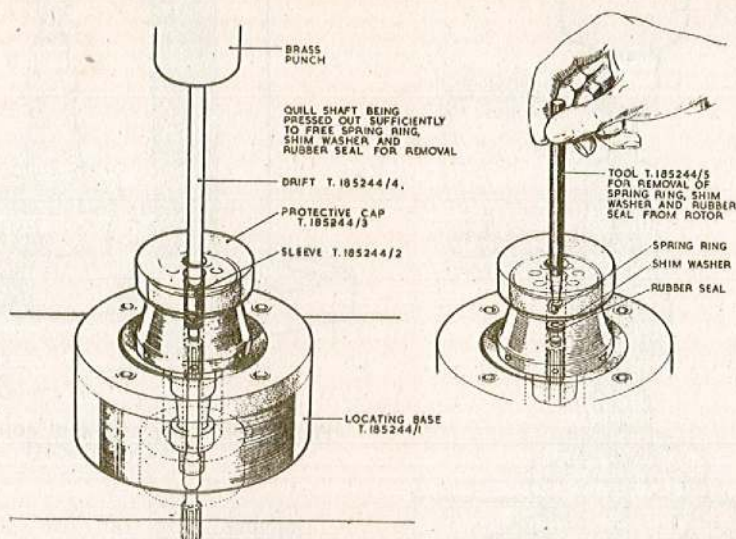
Removal of spring ring, shim washer and rubber seal from rotor quill shaft, using tool T.185244
